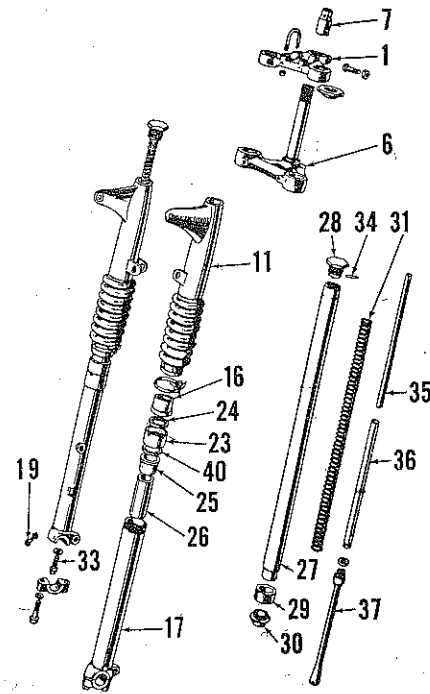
Exploded view of T20S and T20T front suspension unit. Stem (6) rides on 1/4 in. diameter bearings. Fifteen are used in each race.
